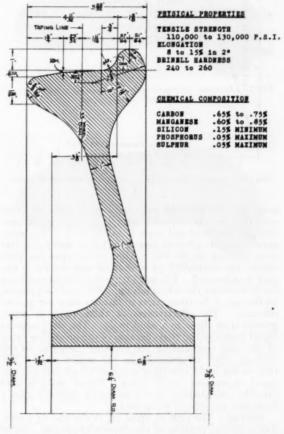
Dimensions of AAR (X-3) EQS wheel for 50-ton cars
